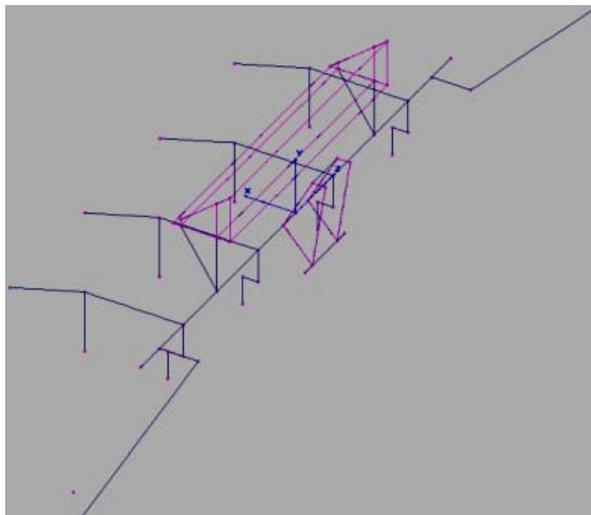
Geometrical model (3D) of the assembly of the Miscanthus planting machine, MPM-4
